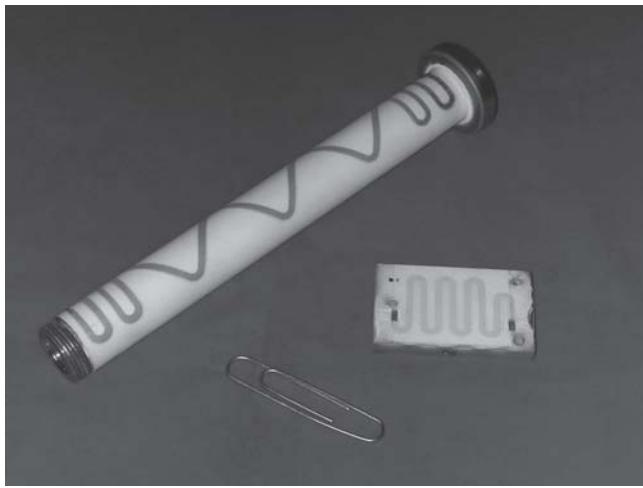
Two types of heating systems implemented in APS (i.e., a hot runner nozzle for injection moulding apparatus and a heating plate)
